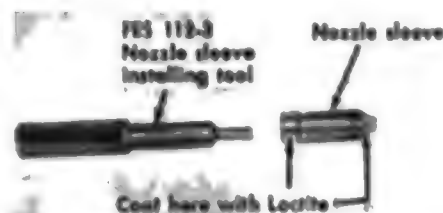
Injector nozzle sleeve installing tool. Apply "Grade 8 Loctite" to sealing surface of nozzle sleeve.
